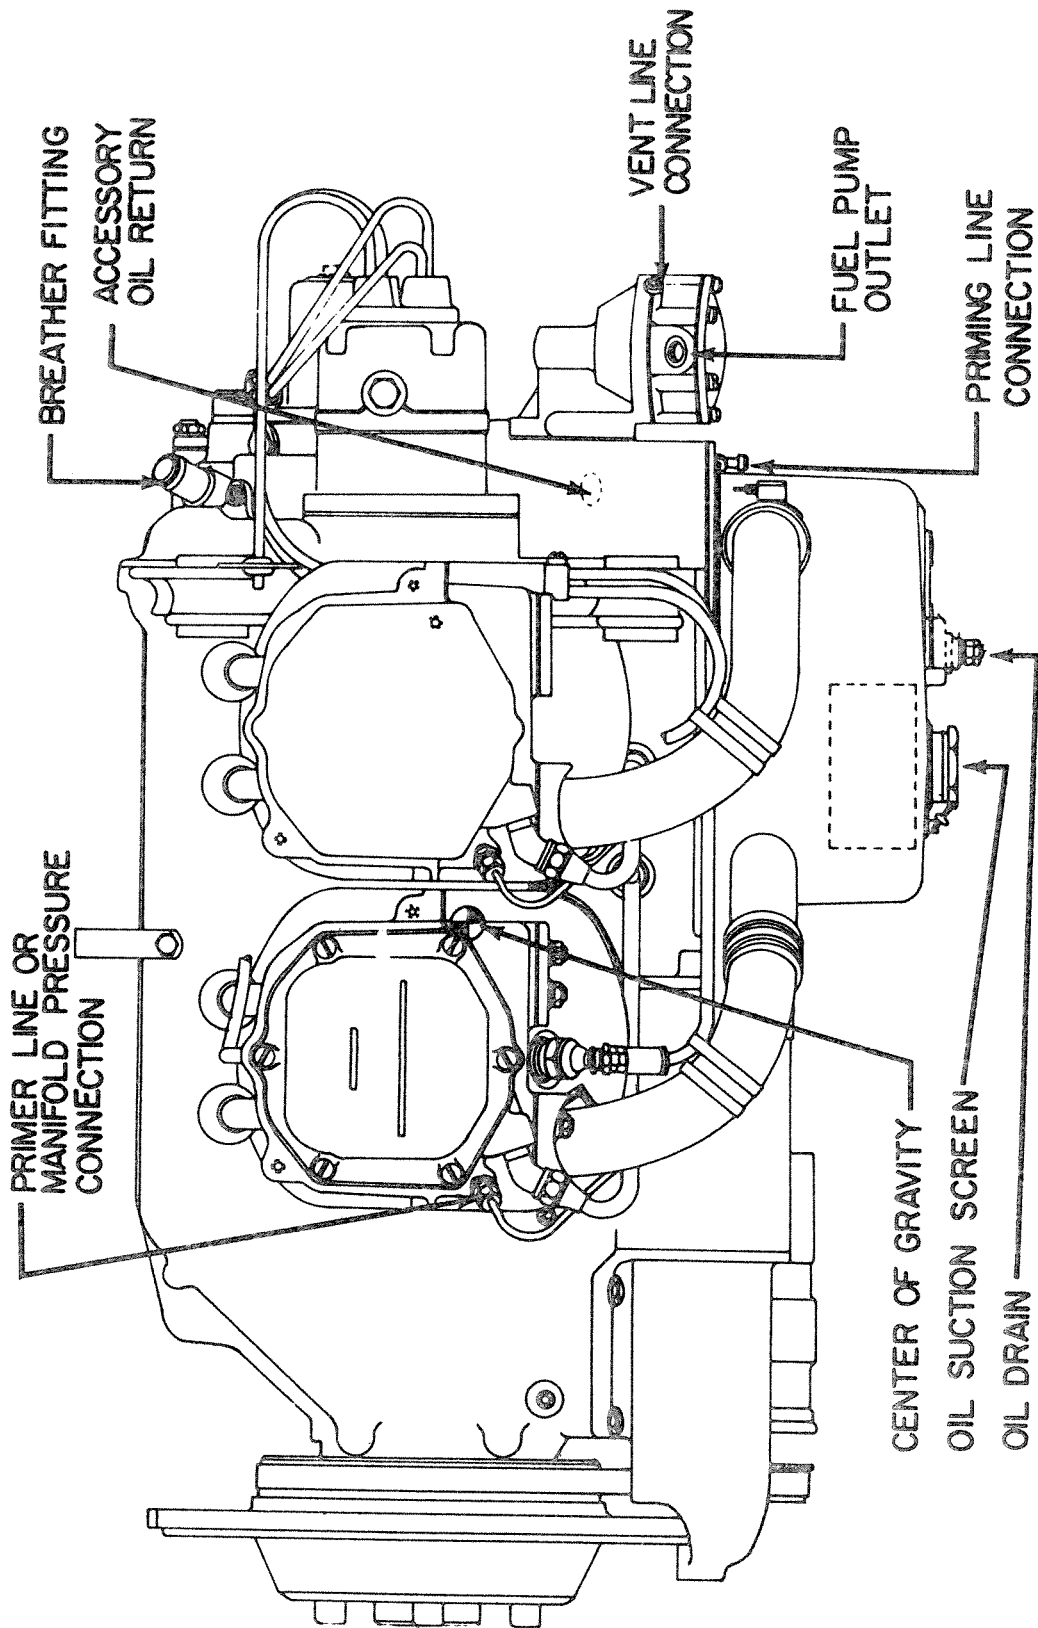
Installation Drawing Left Side View - Typical O-320-A, -B Series
